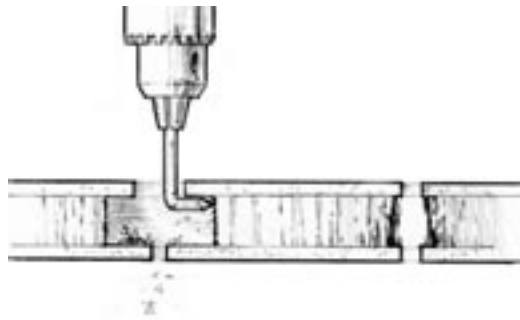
Remove about 12mm of core material around the hole with a bent nail or an Allen key chucked into a drill motor.
